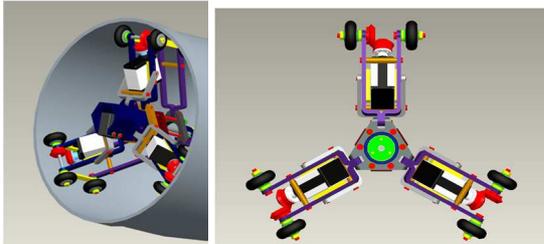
Wheeled machine with adjustable wheels CEREVKA
